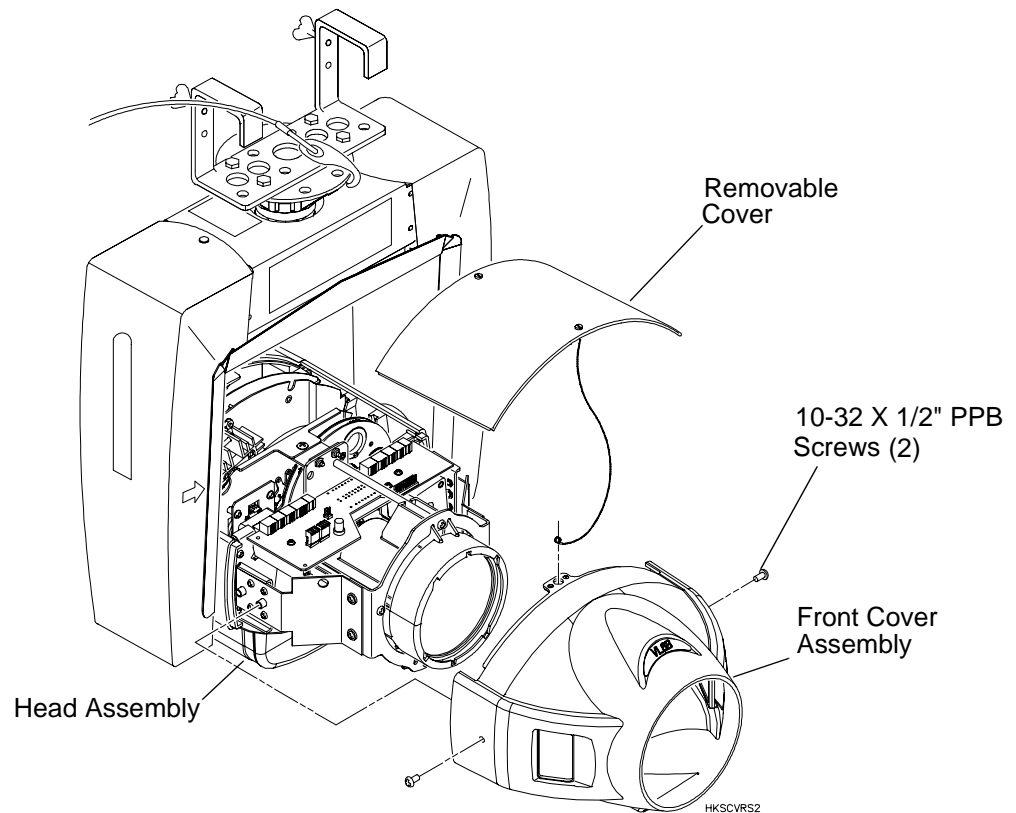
Removing VL6B/VL6C Luminaire Front Cover Assembly
